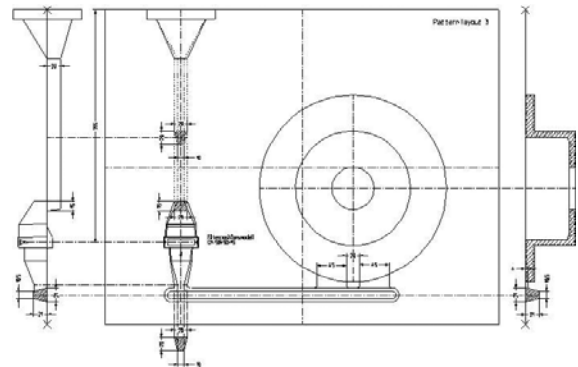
Gating system with filter at the bottom of the mould and cross-over
